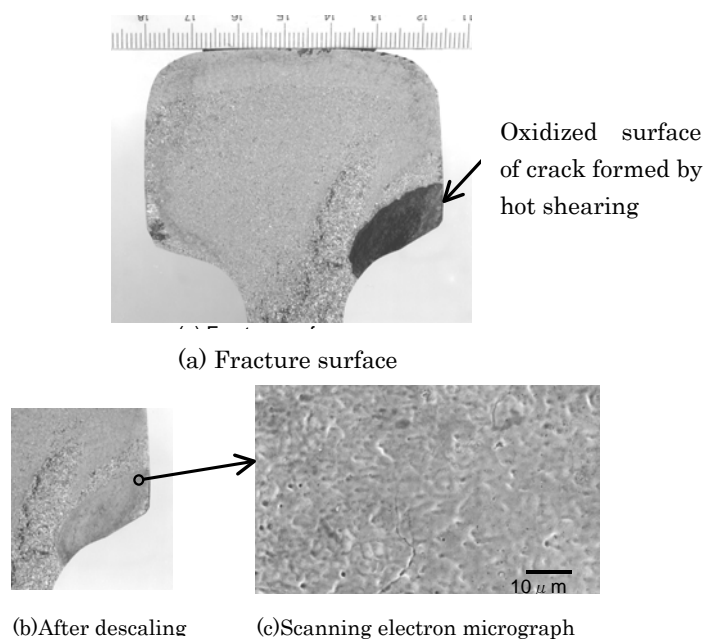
Example of fracture surface of gas pressure weld failure of rail
